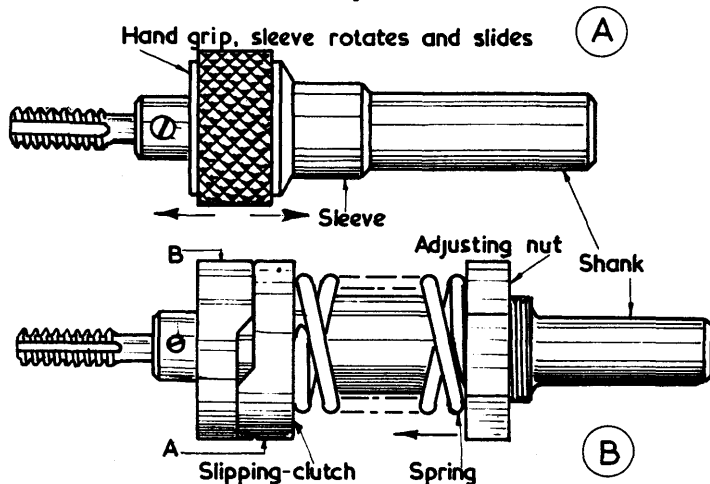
Slipping-clutch Type Tap Holder.
